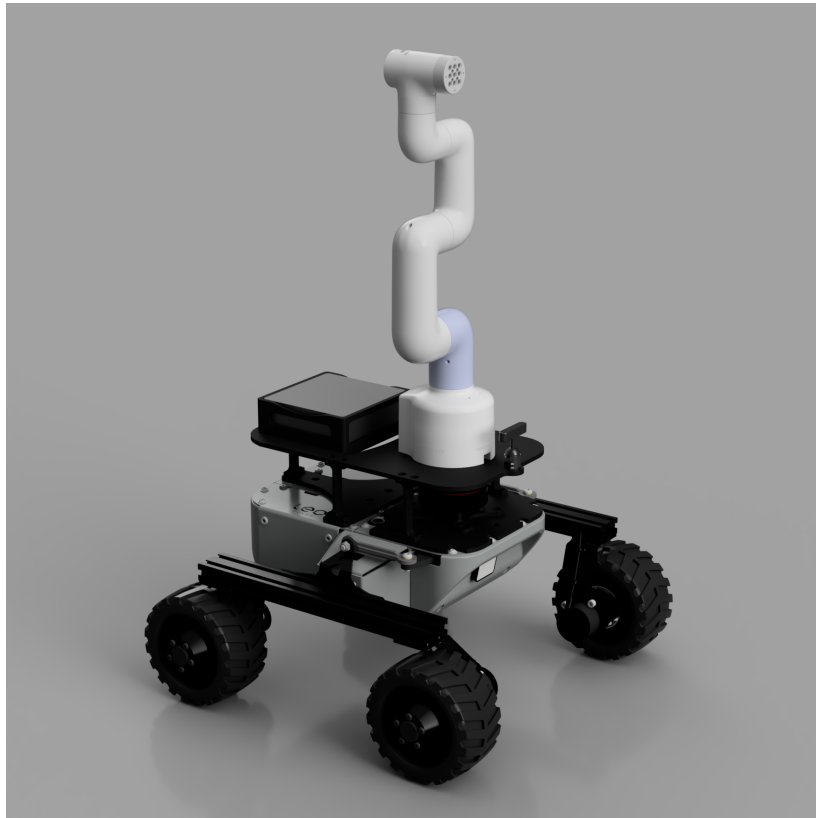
Full CAD assembly showing the Leo Rover with front-mounted LiDAR, front top manipulator and RGB-D camera, and rear top NUC.
